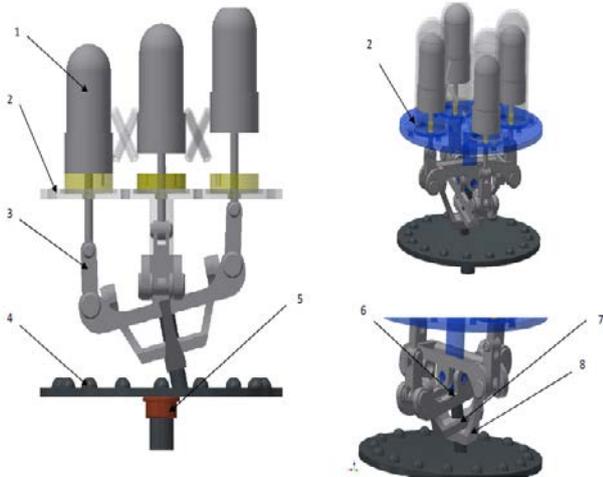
Model of whispergen wobble yoke mechanism: (general view-right side, details of wobble board mechanism-left side): 1- piston, 2- handle cylinders (fixed part), 3- rod, 4- shaft with flywheel, 5- bearing flywheel (fixed part), 6- swing arm, 7- upper connecting segment, 8- lower connecting segment
